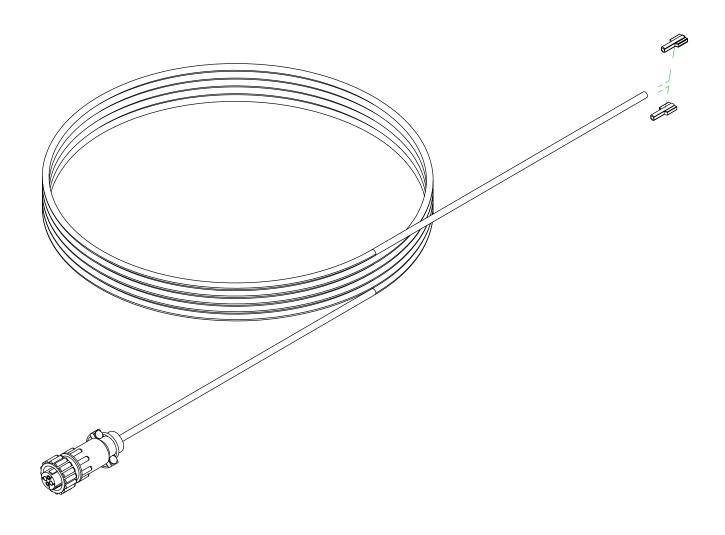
CONDUIT ASSEMBLY FOR MILLER (P/N 85476)
